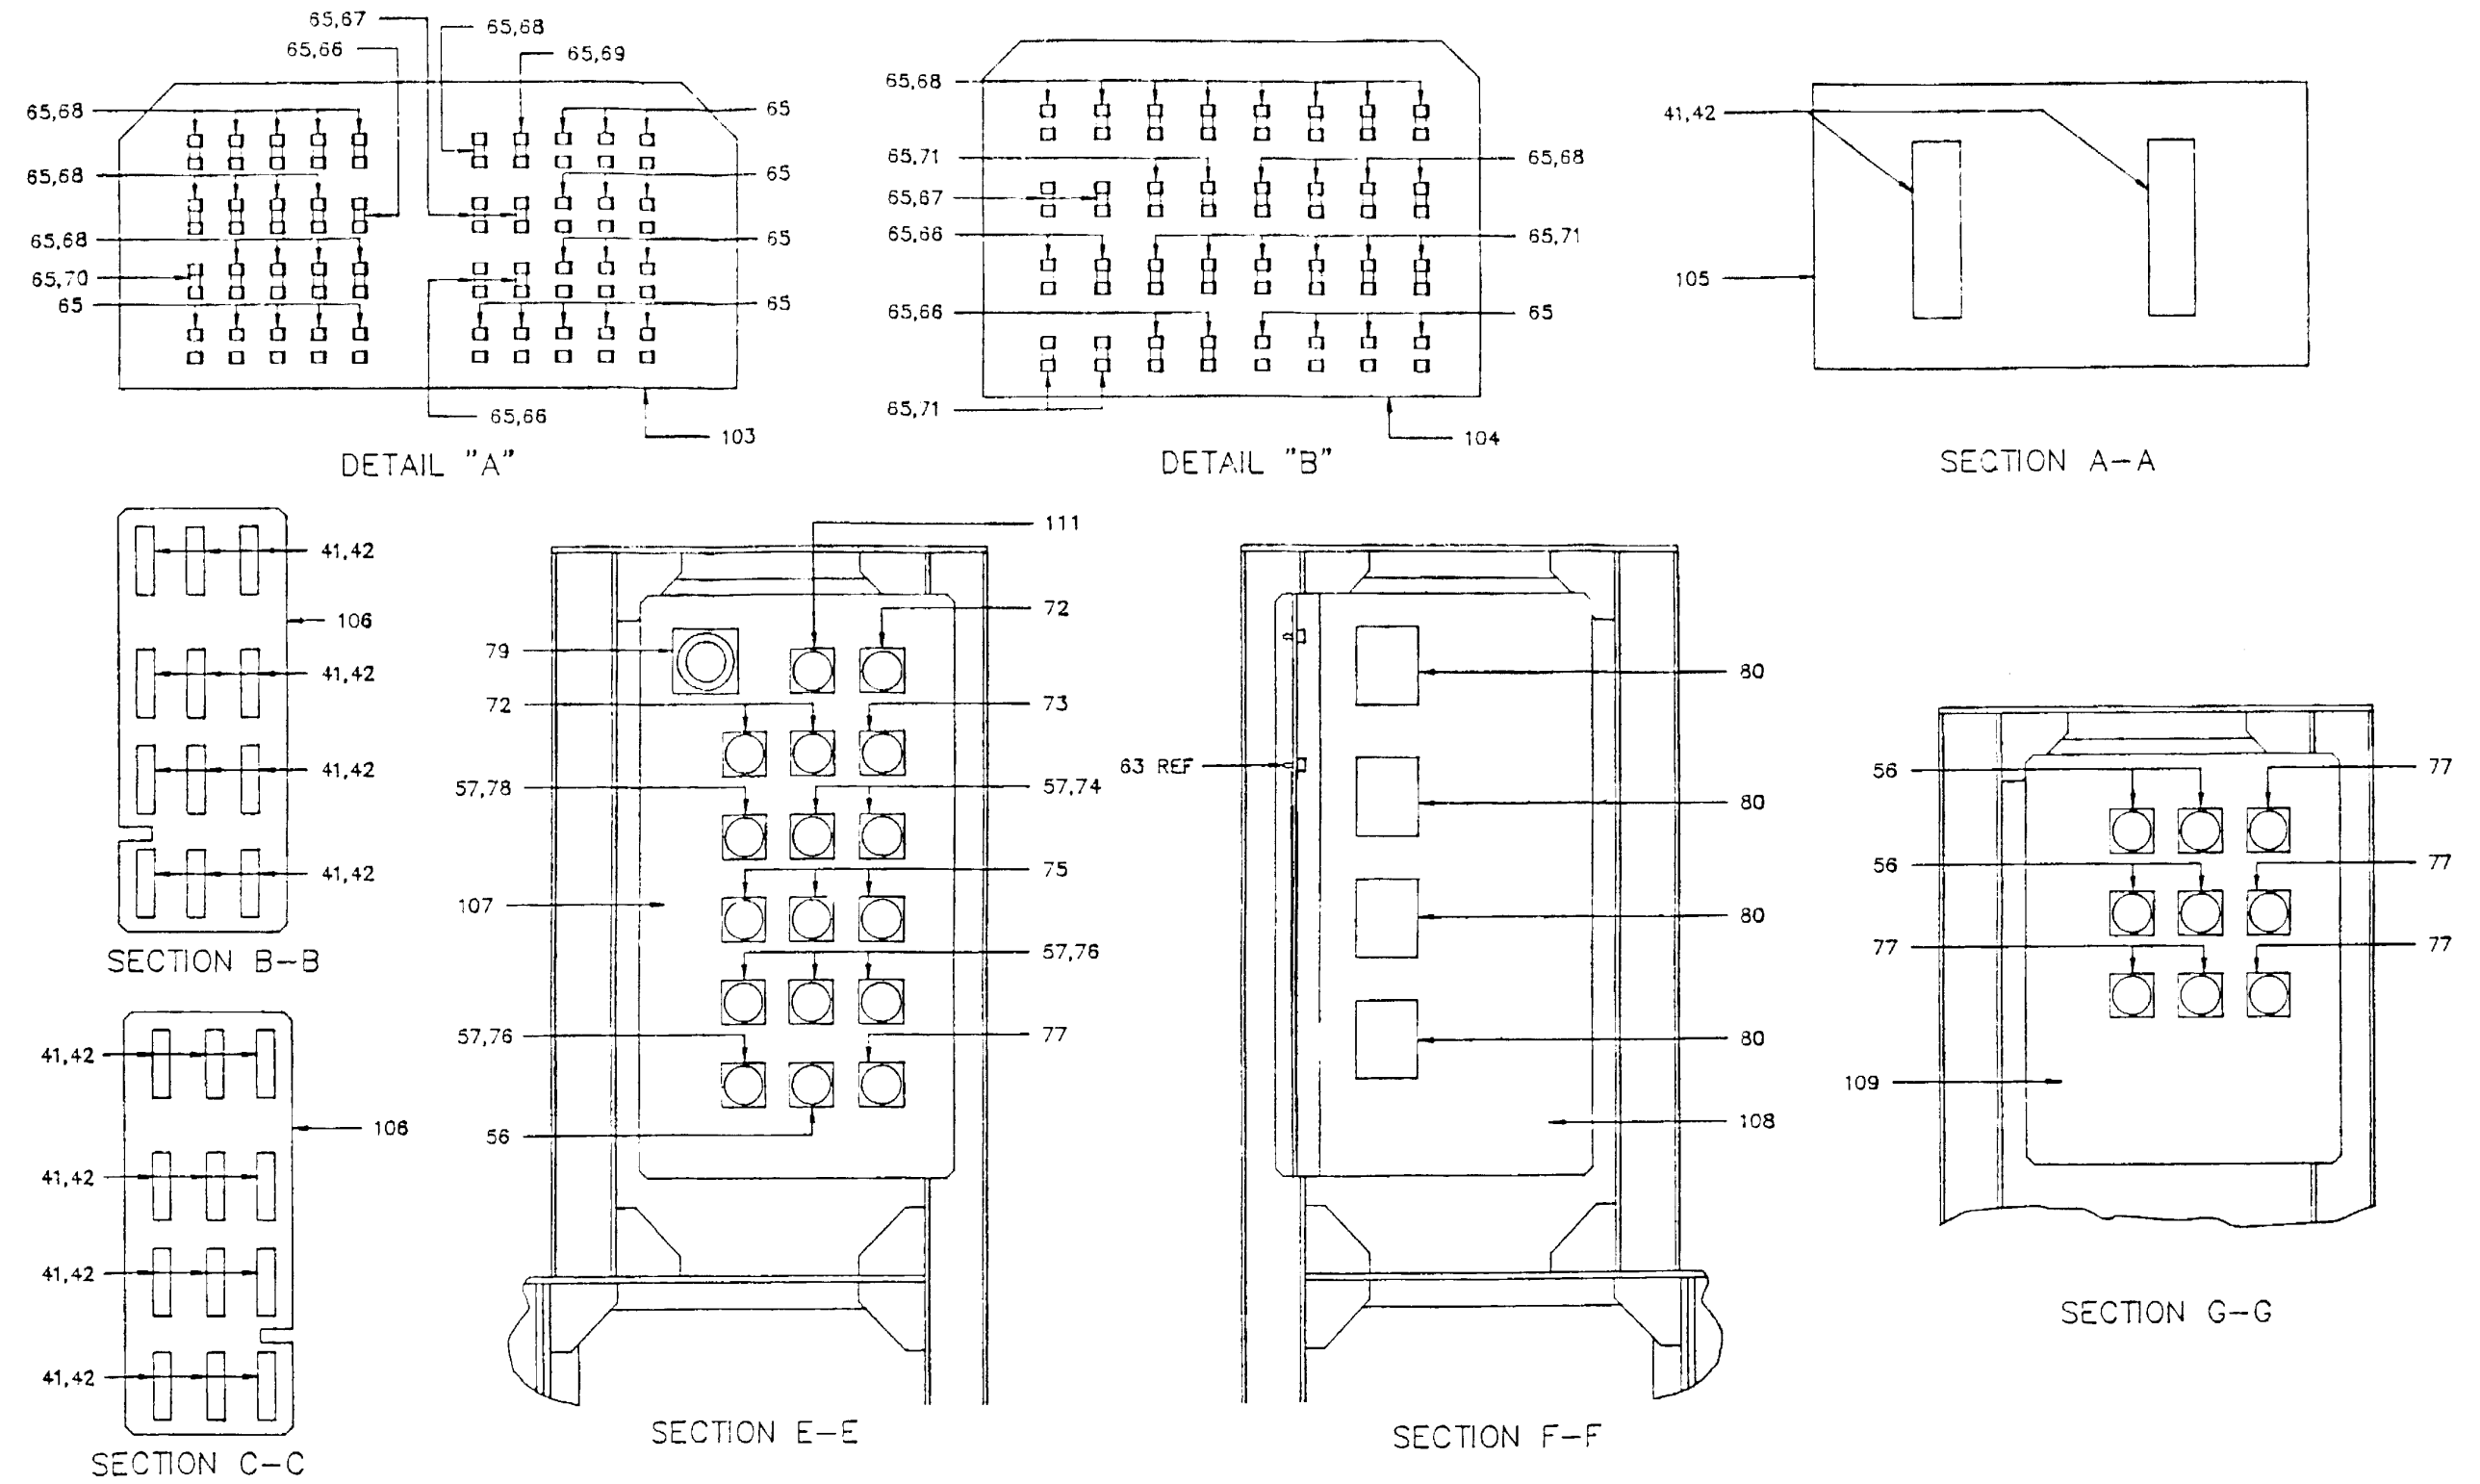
1SG Switchboard Assembly (Sheet 3 of 3)
